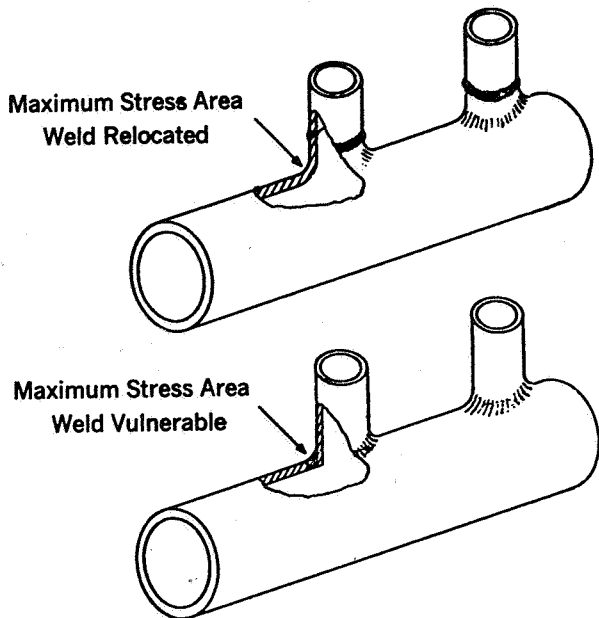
Example of locating welds in areas of known low stress where thermal fatigue failures occur.
